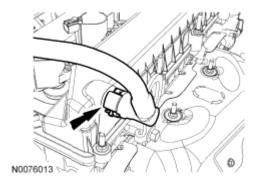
Locating Crankcase Vent Tube And Valve Cover Courtesy of FORD MOTOR CO.
